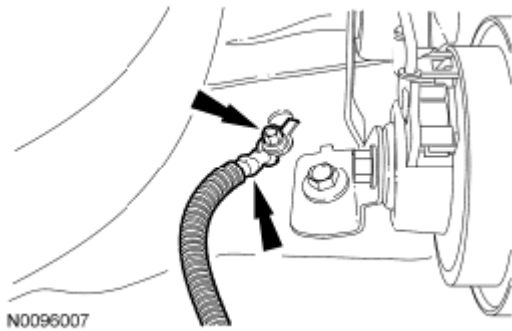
Locating Electronic Power Assist Steering System Wiring Harness Ground & Bolt
